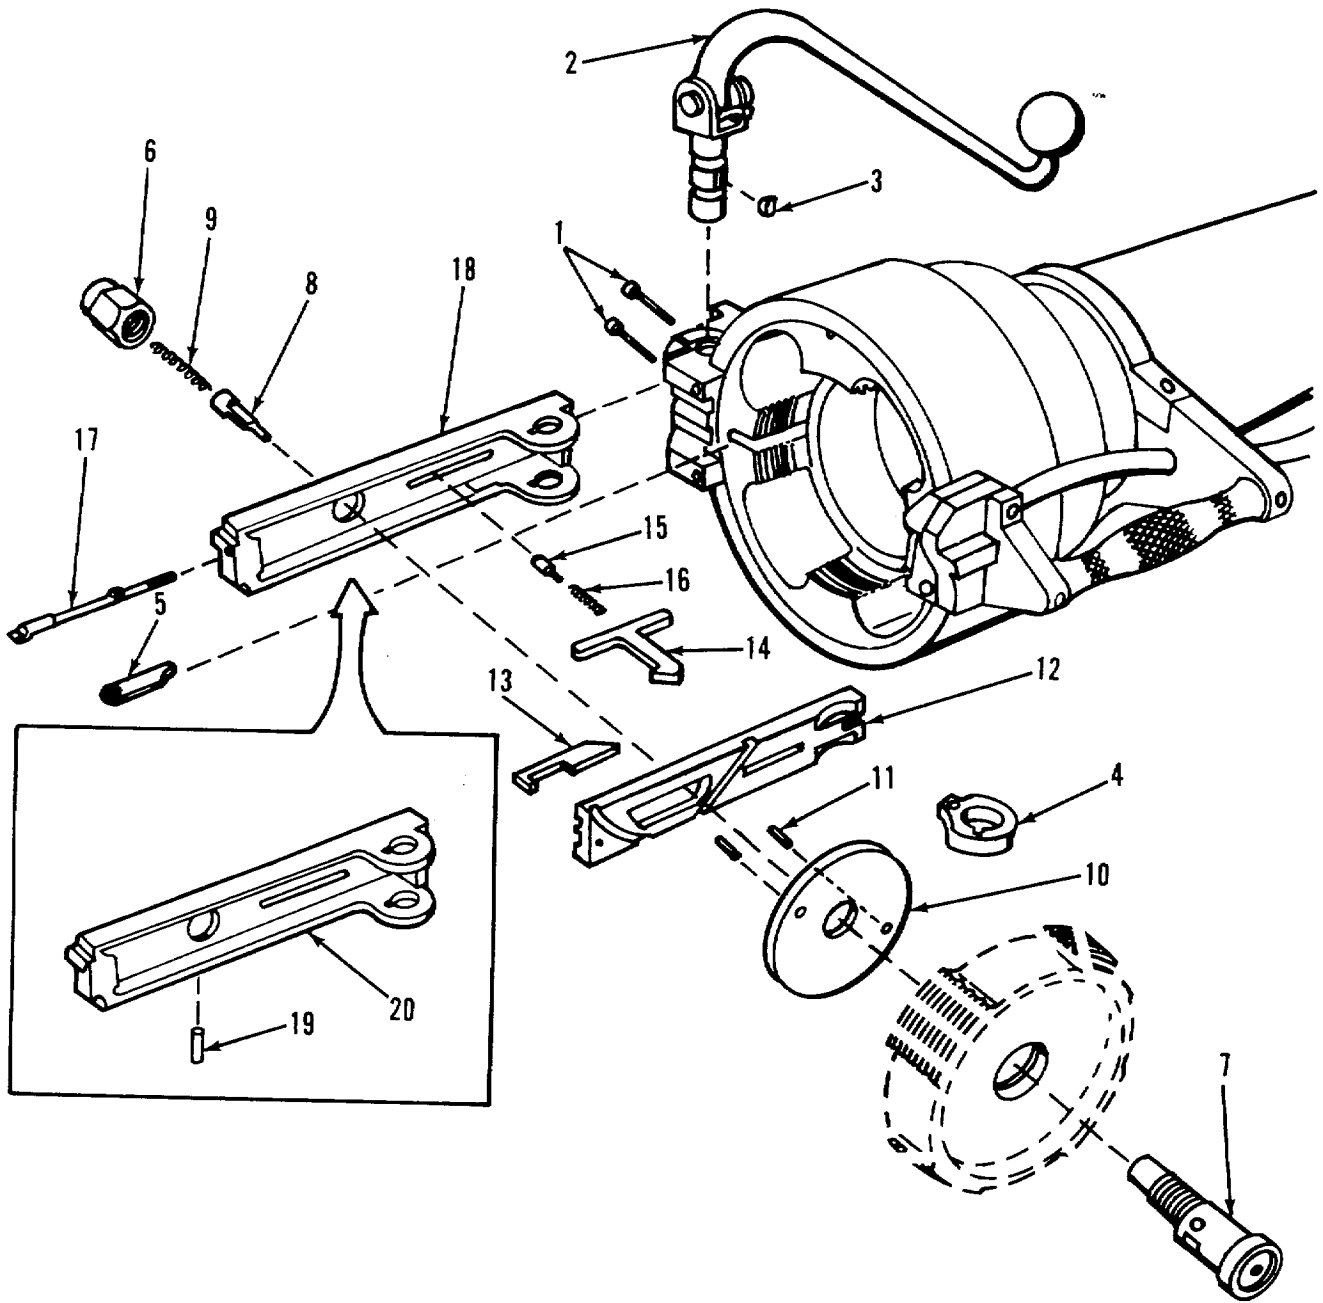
Cannon, 106-MM: M206 and Hinge Assembly.
